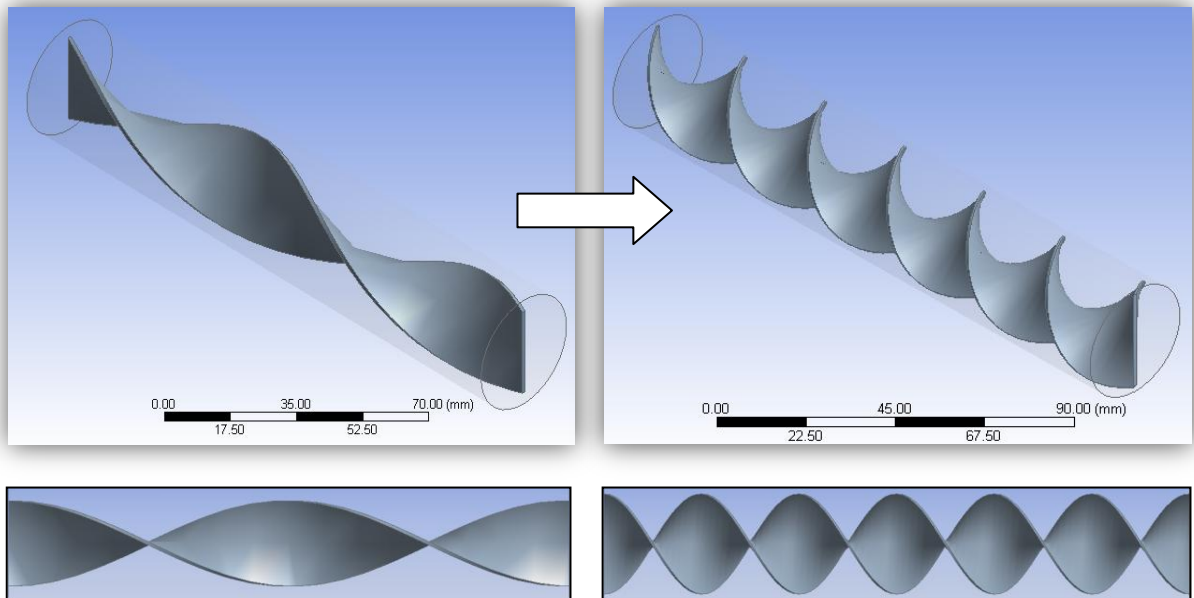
The existing design coil plate (left) and the new design coil plate (right).
